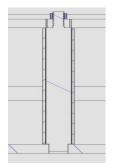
Cross section of the middle gear shaft and the adjustable nut on top of it
